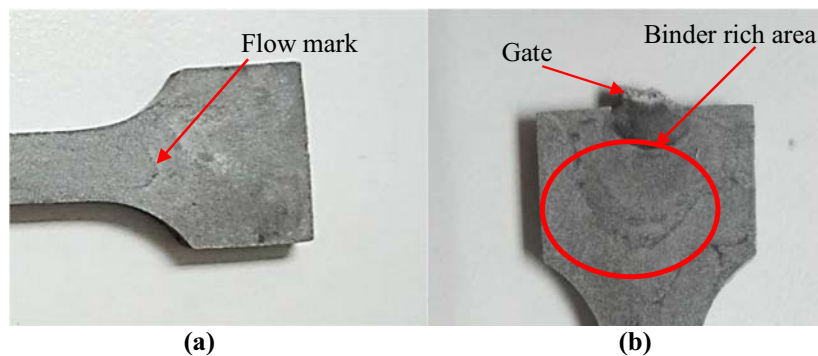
The defects occurs on the molded parts (a) Flow mark (b) powder/binder separation.
